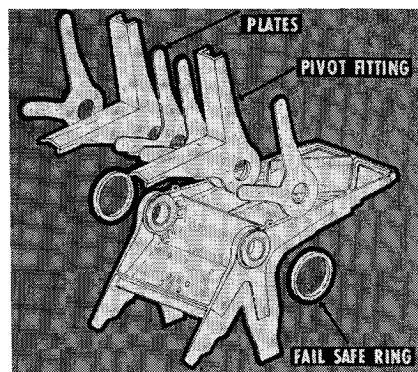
C-5 horizontal stabilizer pivot fitting.
